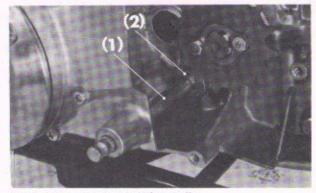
(1) Gear shift spindle (2) Snap ring
